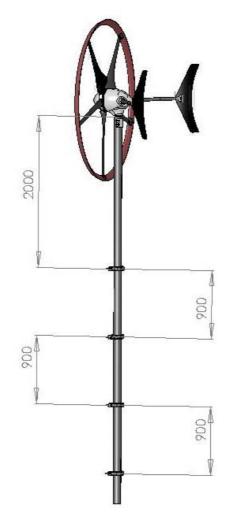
SwiftTM wind turbine assembly showing bracket spacings
